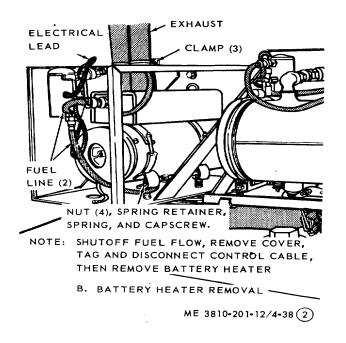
Engine heater and battery heater, removal and installation (sheet 2 of 2)
